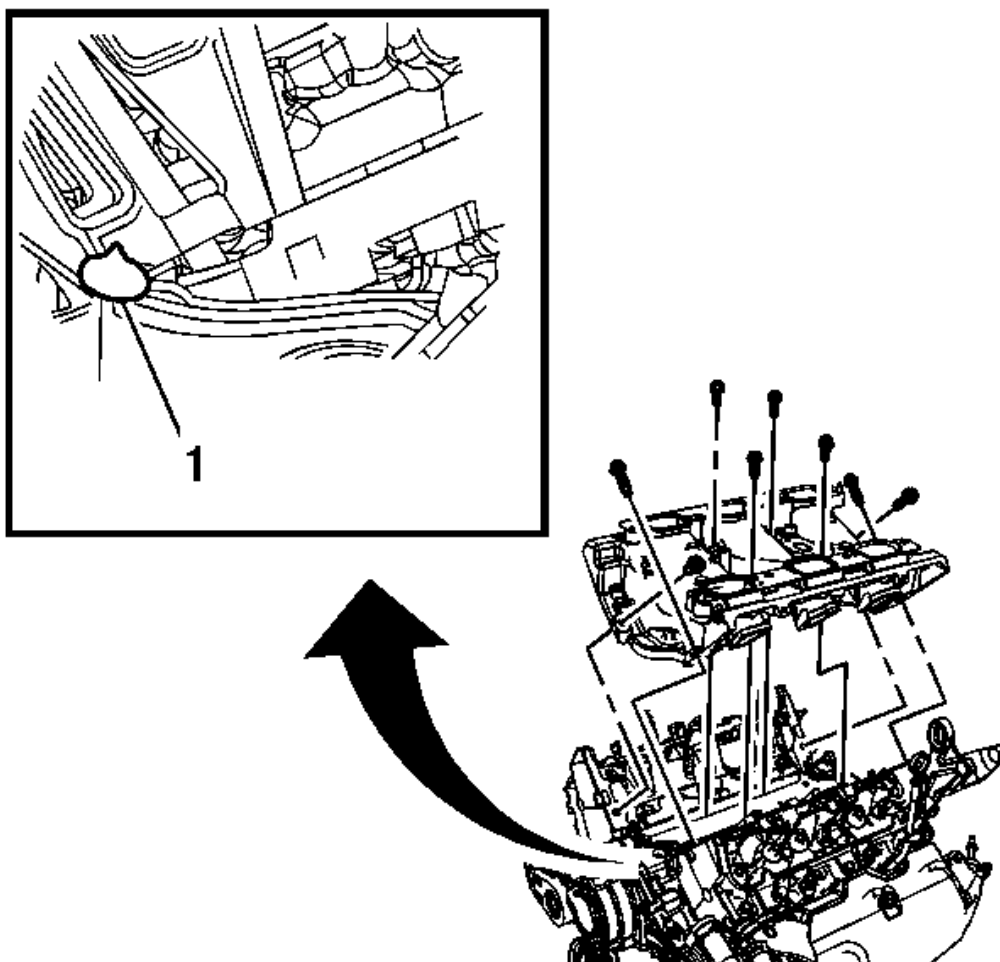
Apply RTV Sealer To The 4 Corners Of The Intake Manifold To Engine Block Joint
